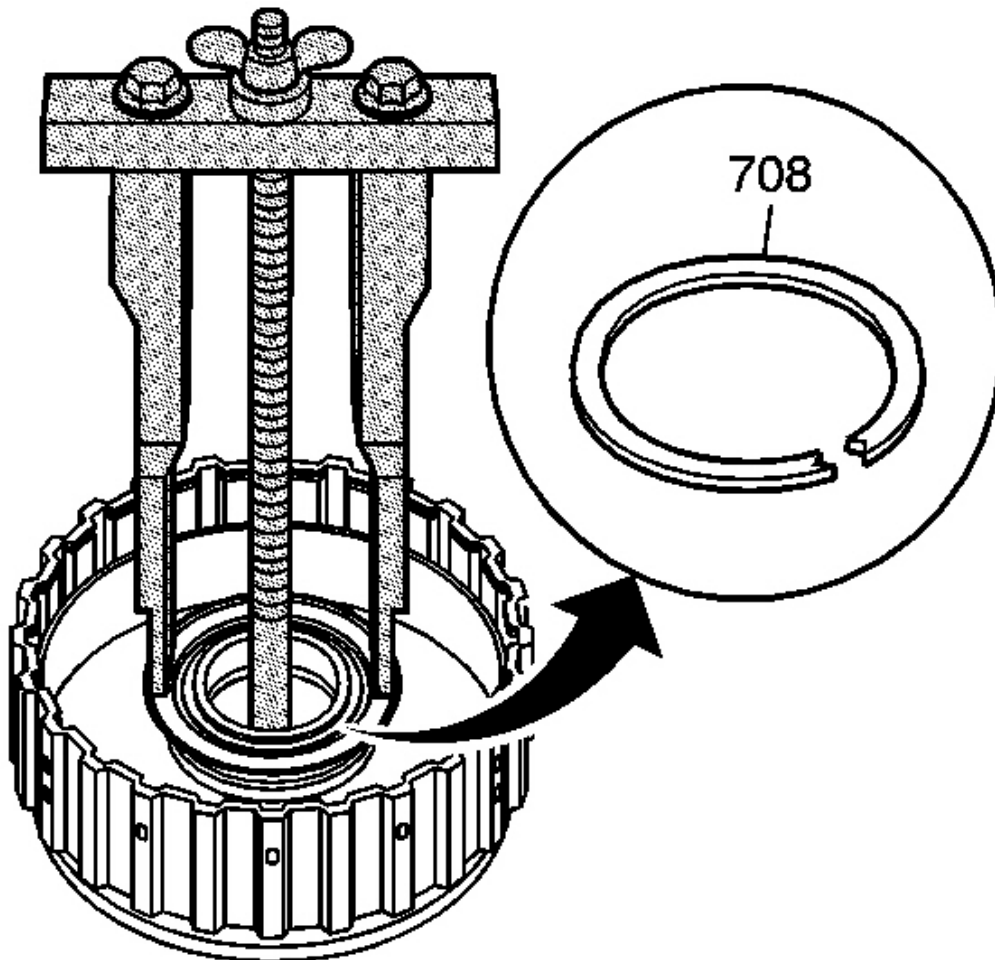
44 mm 1st & Coast Clutch Return Spring Retainer Cap Retaining Ring
